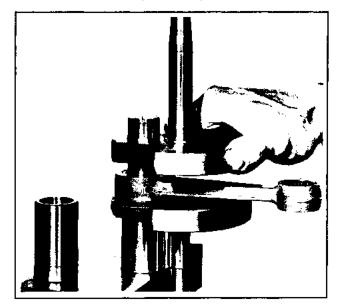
E-73. Setup for Pressing Crank Pin into Circuit Breaker Crankshaft (1963-1976)
